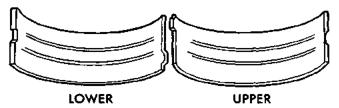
Connecting Rod Bearing Inspection CONNECTING RODS
